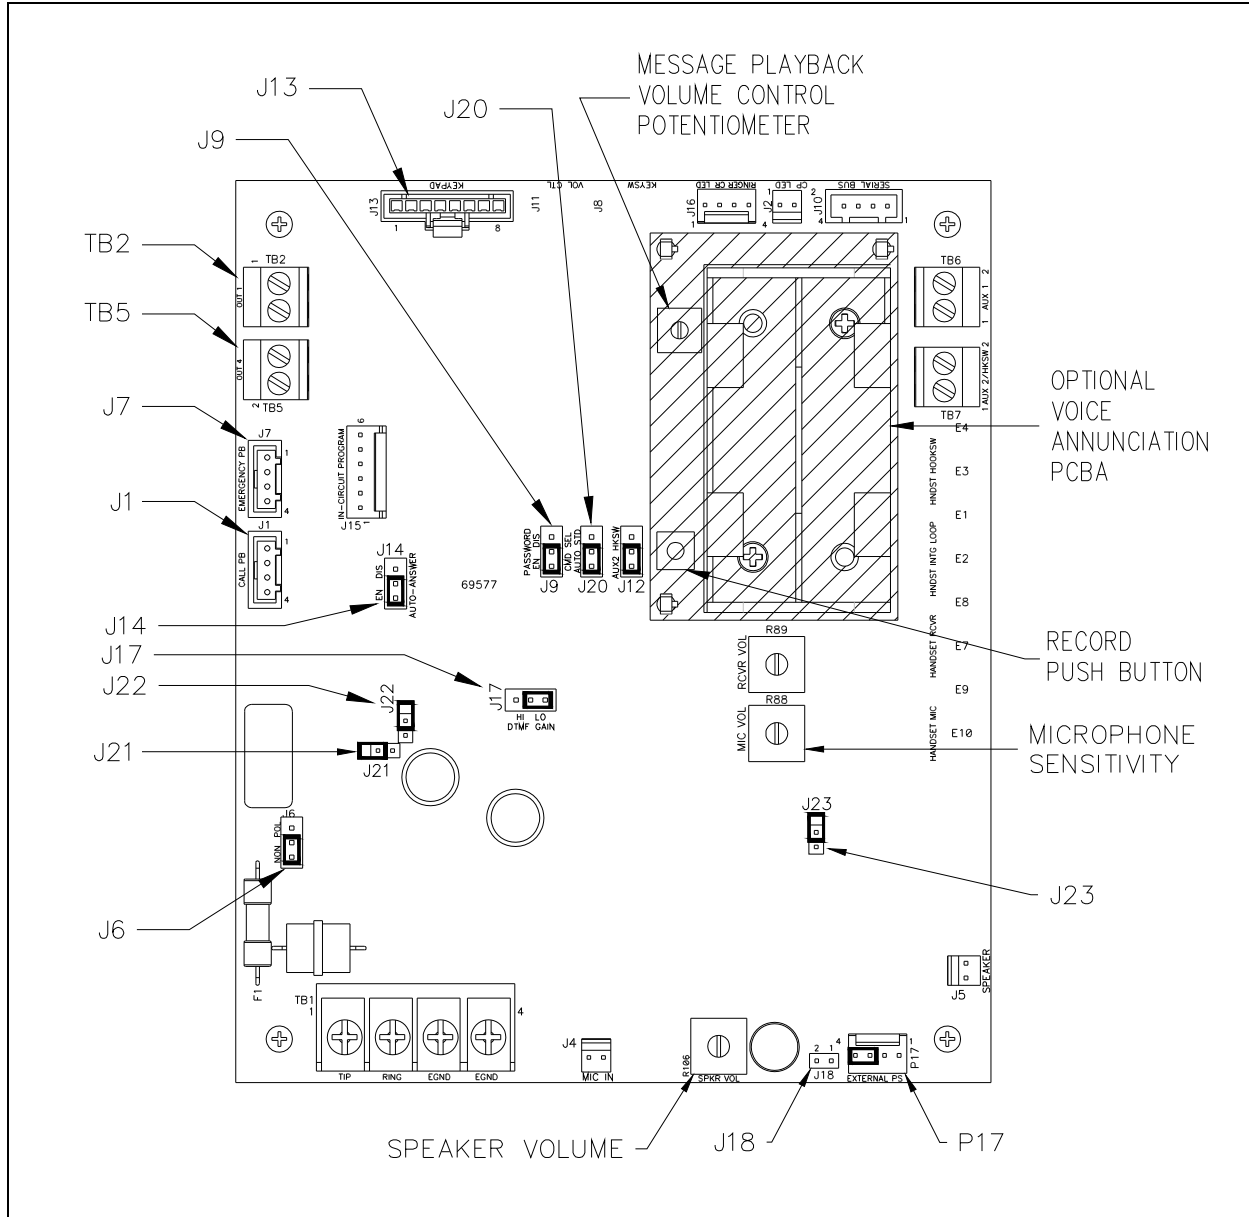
No. 69577-101 Emergency Telephone PCBA (Top View)
